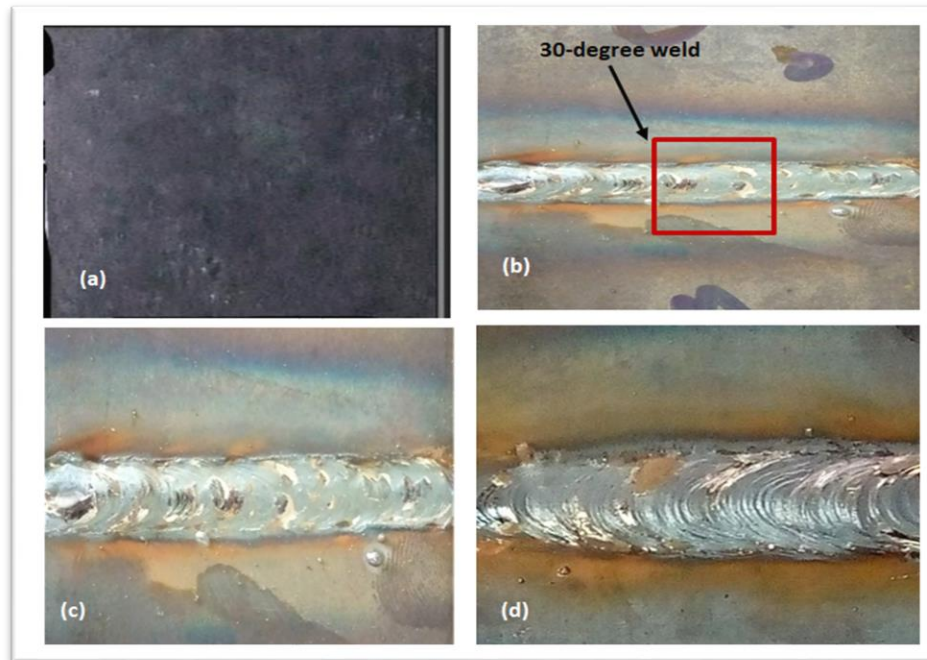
4. Welding angle (a) Base metal 413 , (b) 15 oC (c)30o C and (d) 45oC
